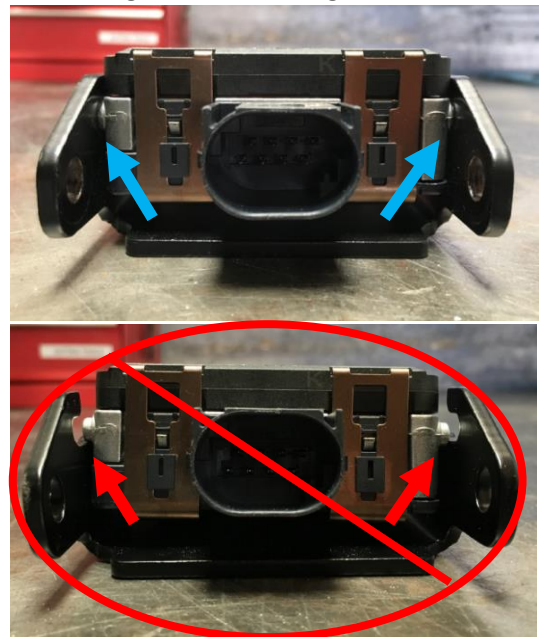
Acceptable (top) and Unacceptable (bottom) Sensor Engagement
